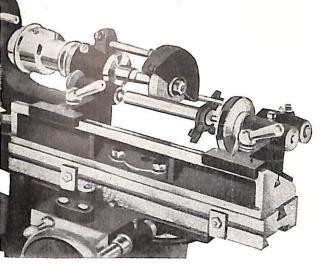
Cylindrical grinding in 'Alba' grinder
